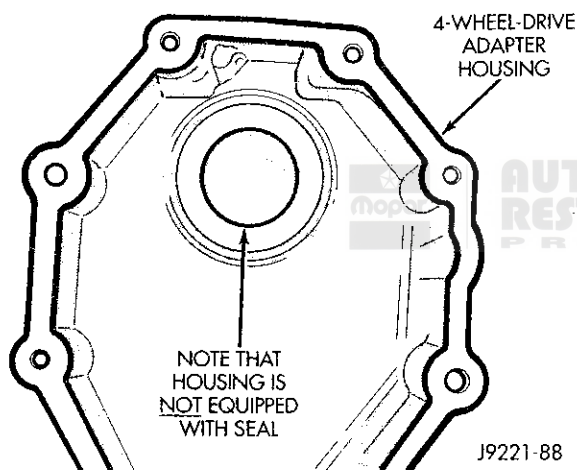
Adapter Housing (4-Wheel Drive Models)
